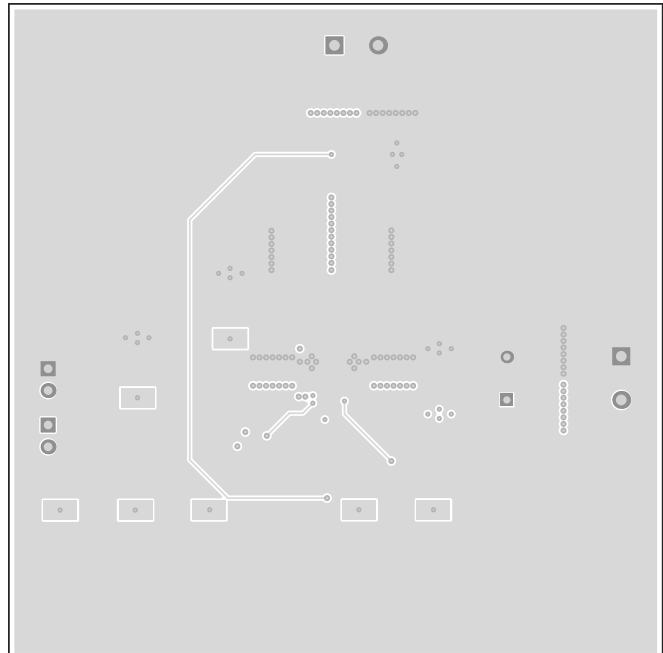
TPS54424EVM-779 Bottom-Side Composite View
